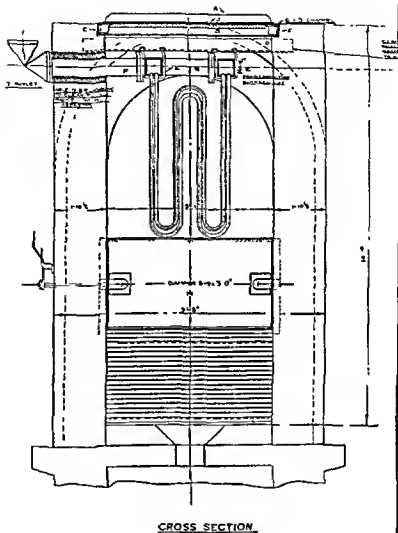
(Drawing No 25705/18) —Arrangement of Si
